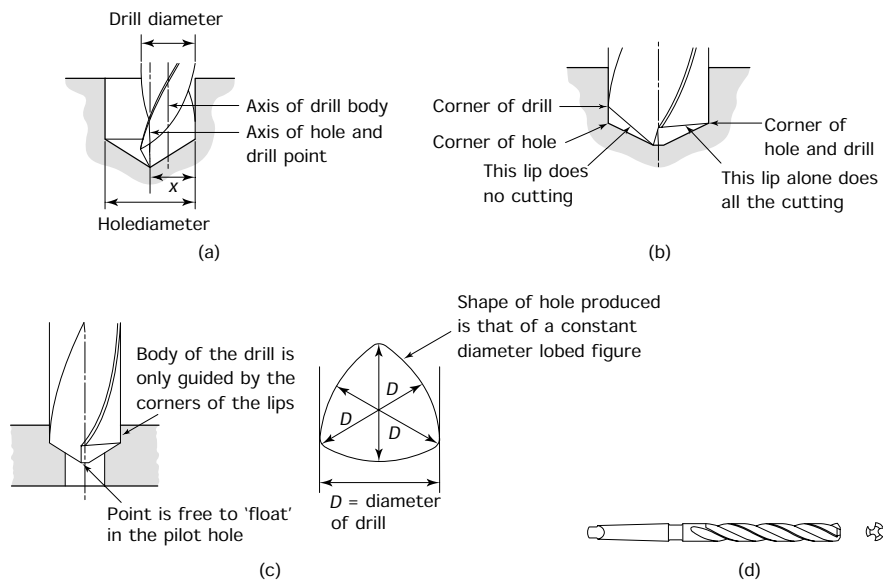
Hole faults: (a) effect of unequal lip length – diameter of hole drilled = $2x$, where x = greatest distance from drill point to a corner; oversized hole is caused by drill being ground off centre; (b) unequal angles – only one lip cuts; (c) out of roundness resulting from opening up a pilot hole with a two-flute drill; (d) three-flute core drill will open up an existing hole without loss of roundness
